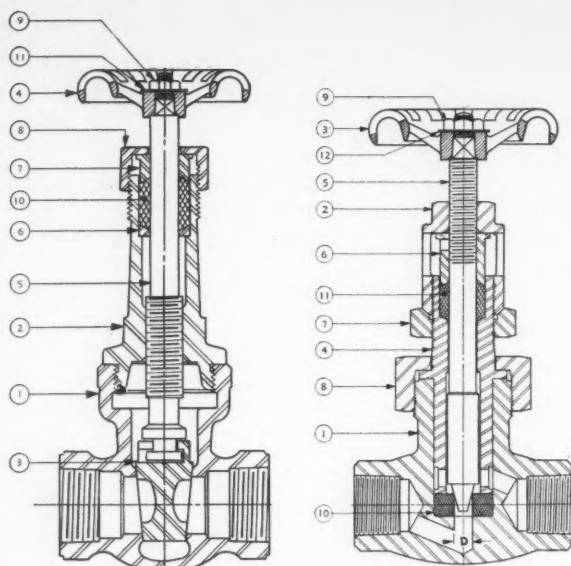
(Left)—Gate valve. Identification of parts: 1. Body. 2. Bonnet. 3. Wedge. 4. Handwheel. 5. Stem. 6. Packing ring. 7. Gland follower. 8. Packing nut. 9. Wheel nut. 10. Packing. 11. Identification plate.
